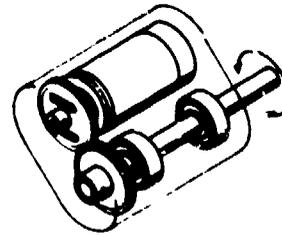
Coupling of the intermediate shaft by gears
